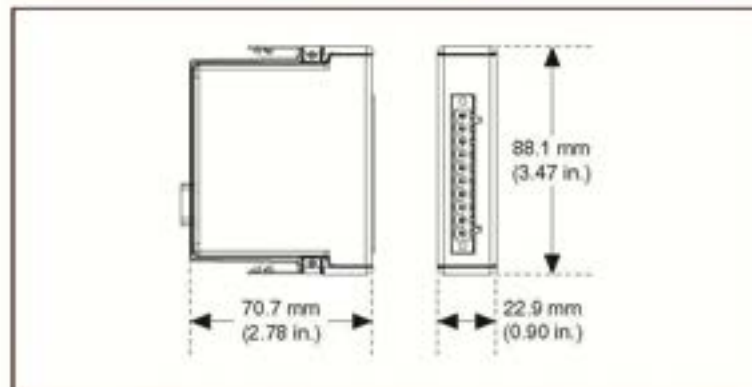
C Series I/O Module, Front and Side View with Dimensions
